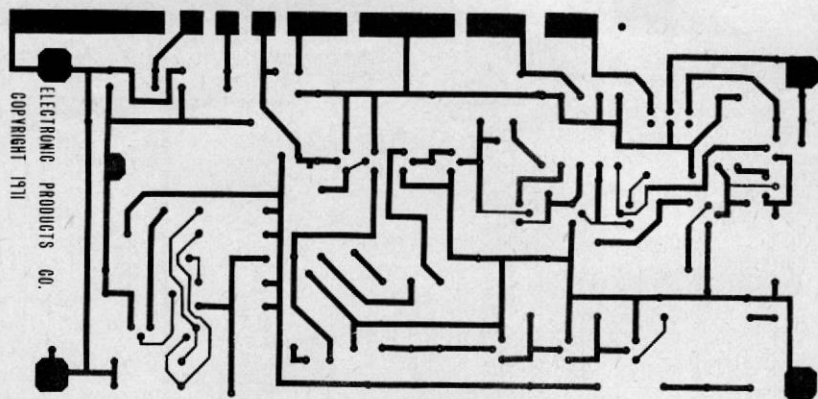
PRINTED CIRCUIT BOARD, reduced to one-half its actual dimensions.
